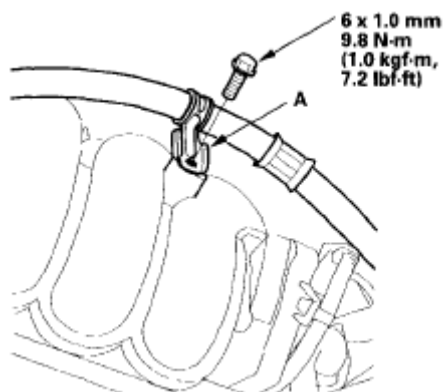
Identifying Pump Outlet Hose Clamp (With Torque Specifications)
